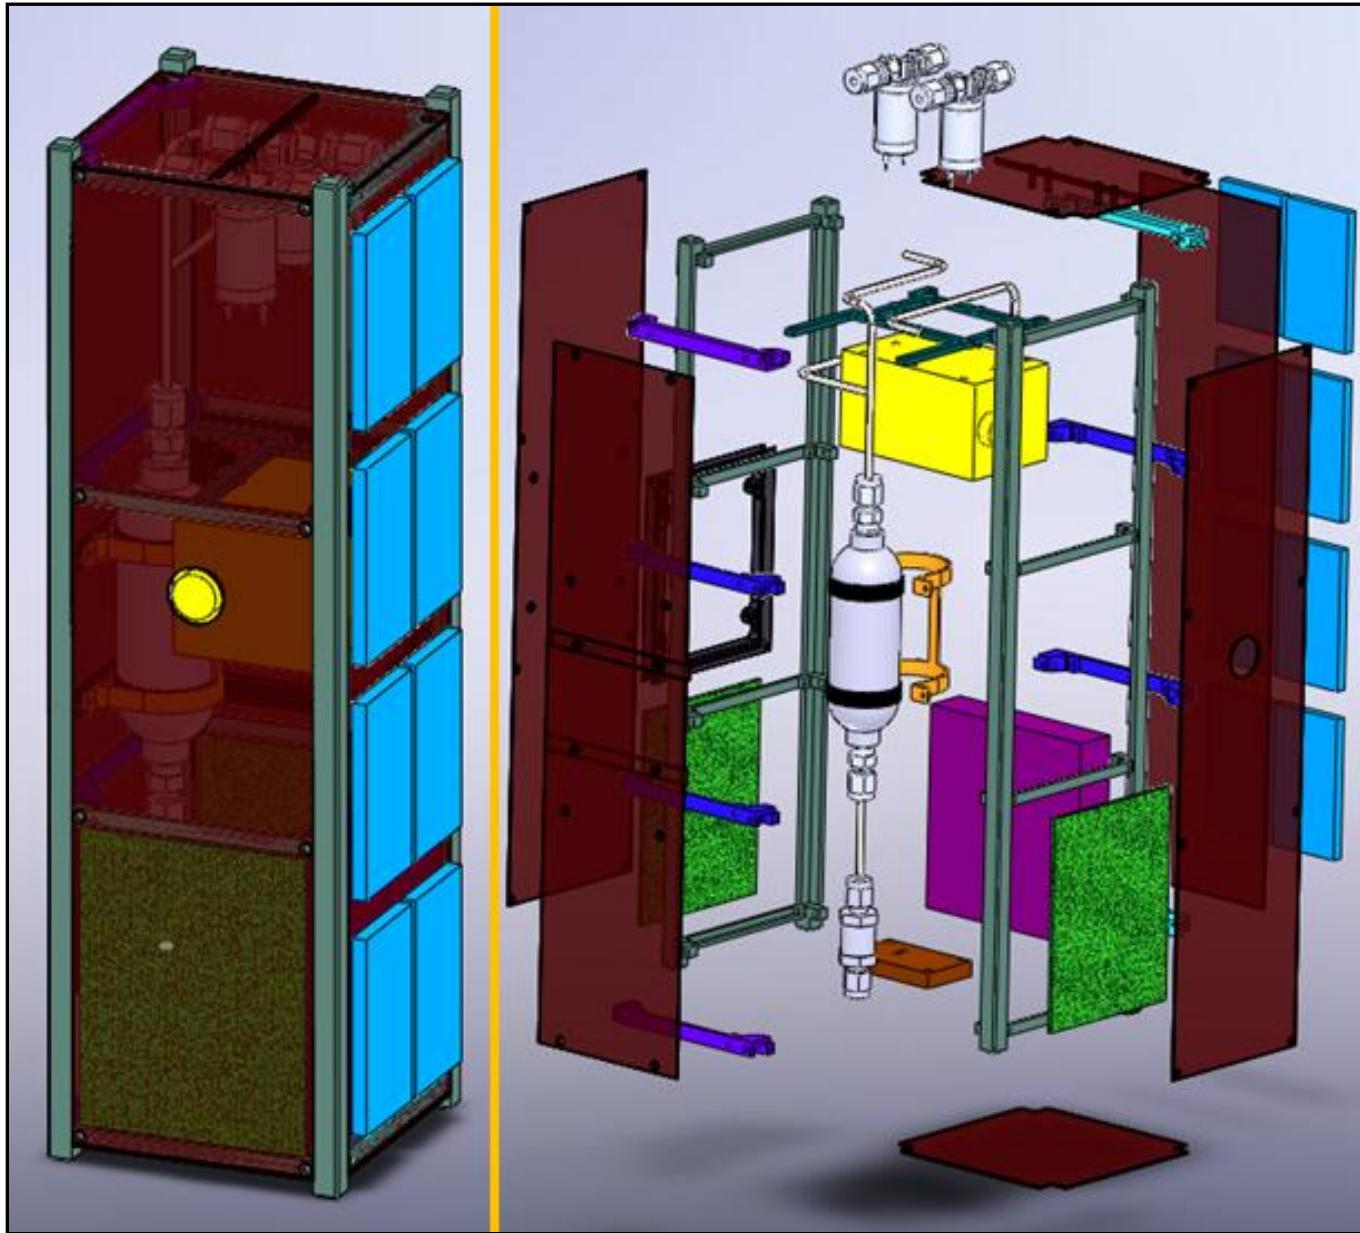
Modular Design 2 CAD Assembly for a 3U CubeSat in exploded (left) and collapsed configurations (right)
